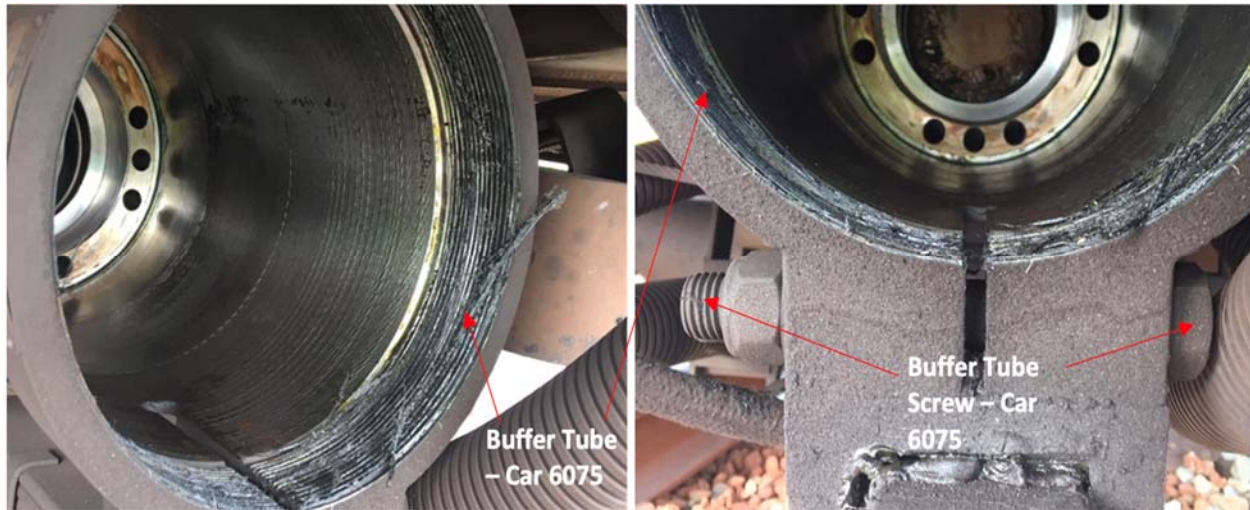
Left – Car 6075 – F-End Buffer Tube
